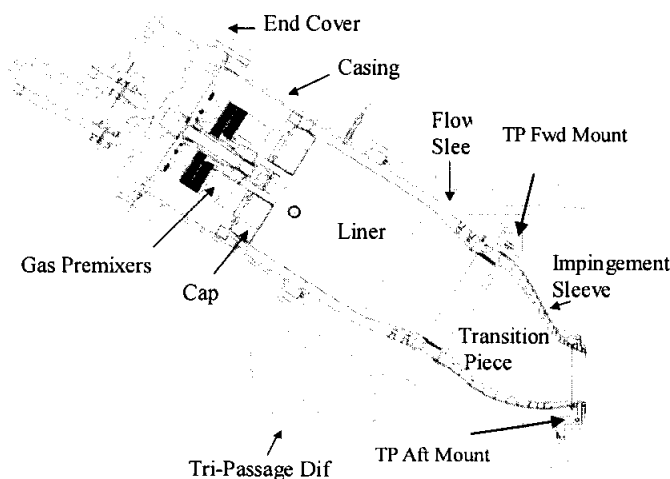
shows a cross-section taken through a single combustion chamber, including parts of the compressor discharge casing and turbine casing of the gas turbine.
